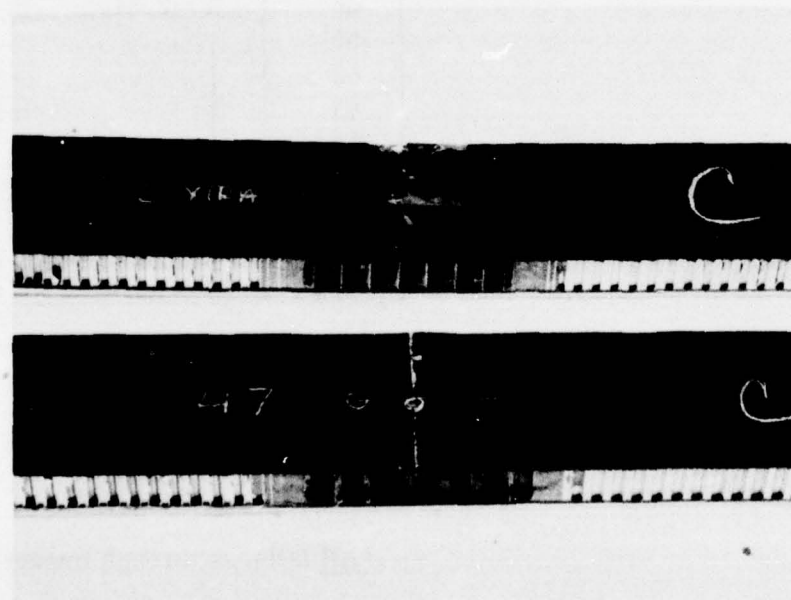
Typical Four Point Bend Sandwich Beam Compression Specimens; Control and Damaged
